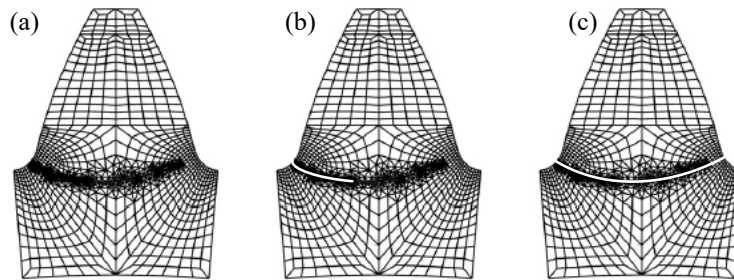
Gear crack stages (a) initiation, (b) propagation, and (c) fracture
